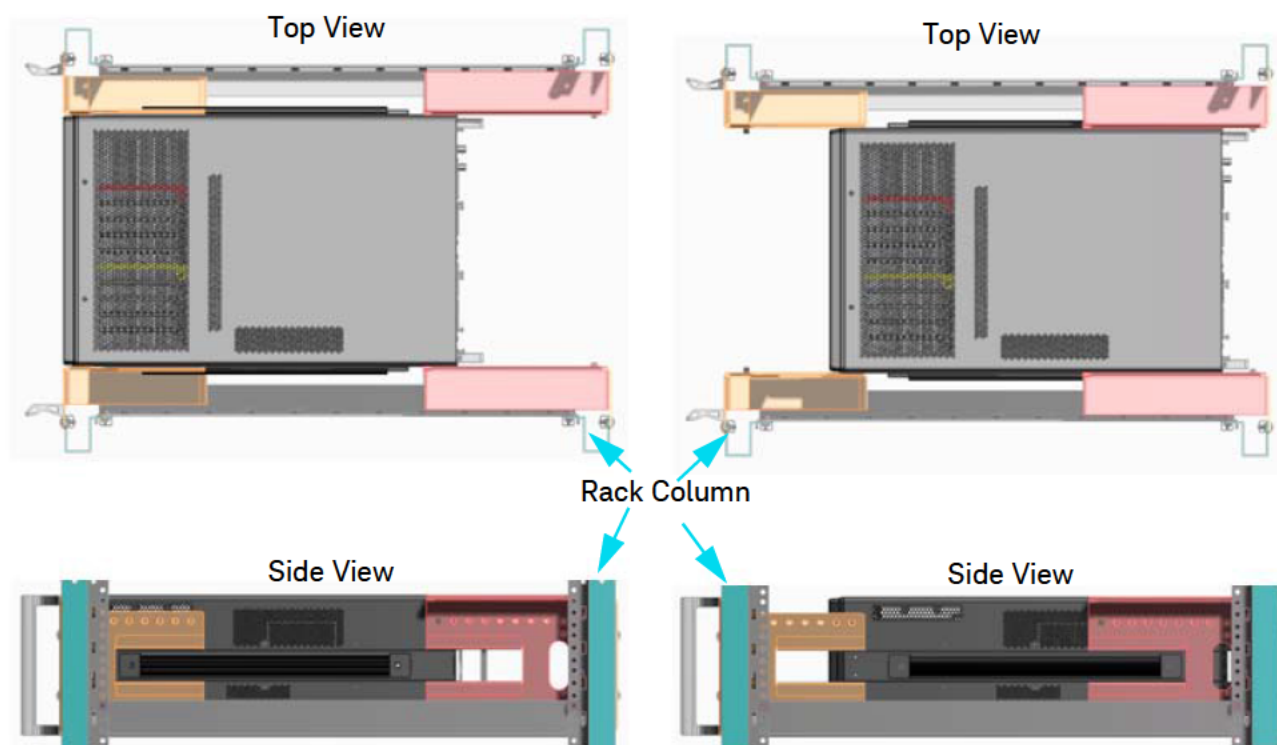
Y1271A Rack Kit shown with M9010A PXle Chassis – Flush and Recessed Installation
